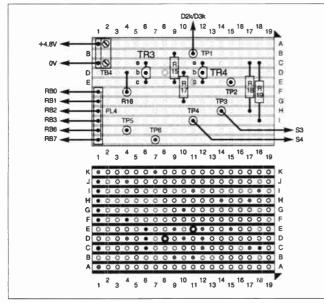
Distribution stripboard component layout and wiring. The completed board is shown above right.
